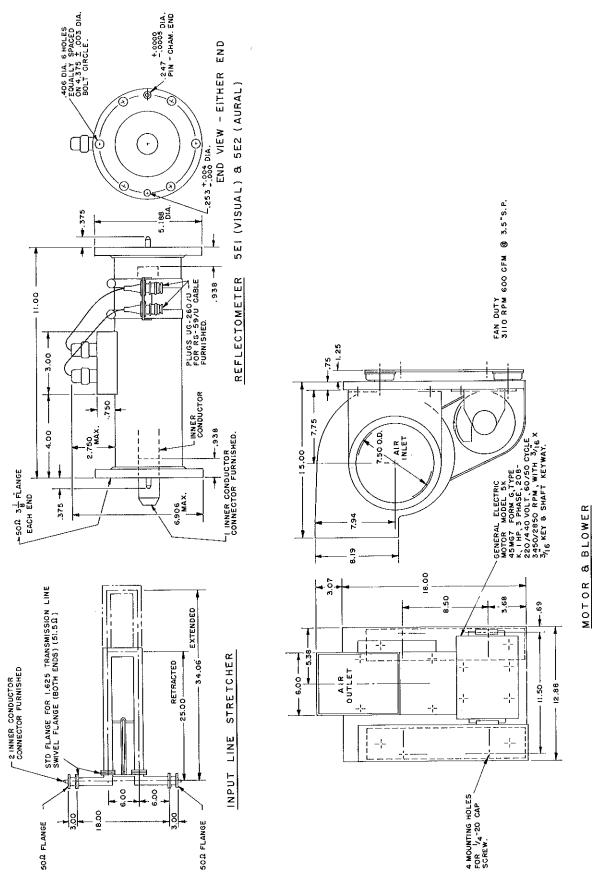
Outline Drawing: Input Line Stretcher, Reflectometer, Motor and Blower
